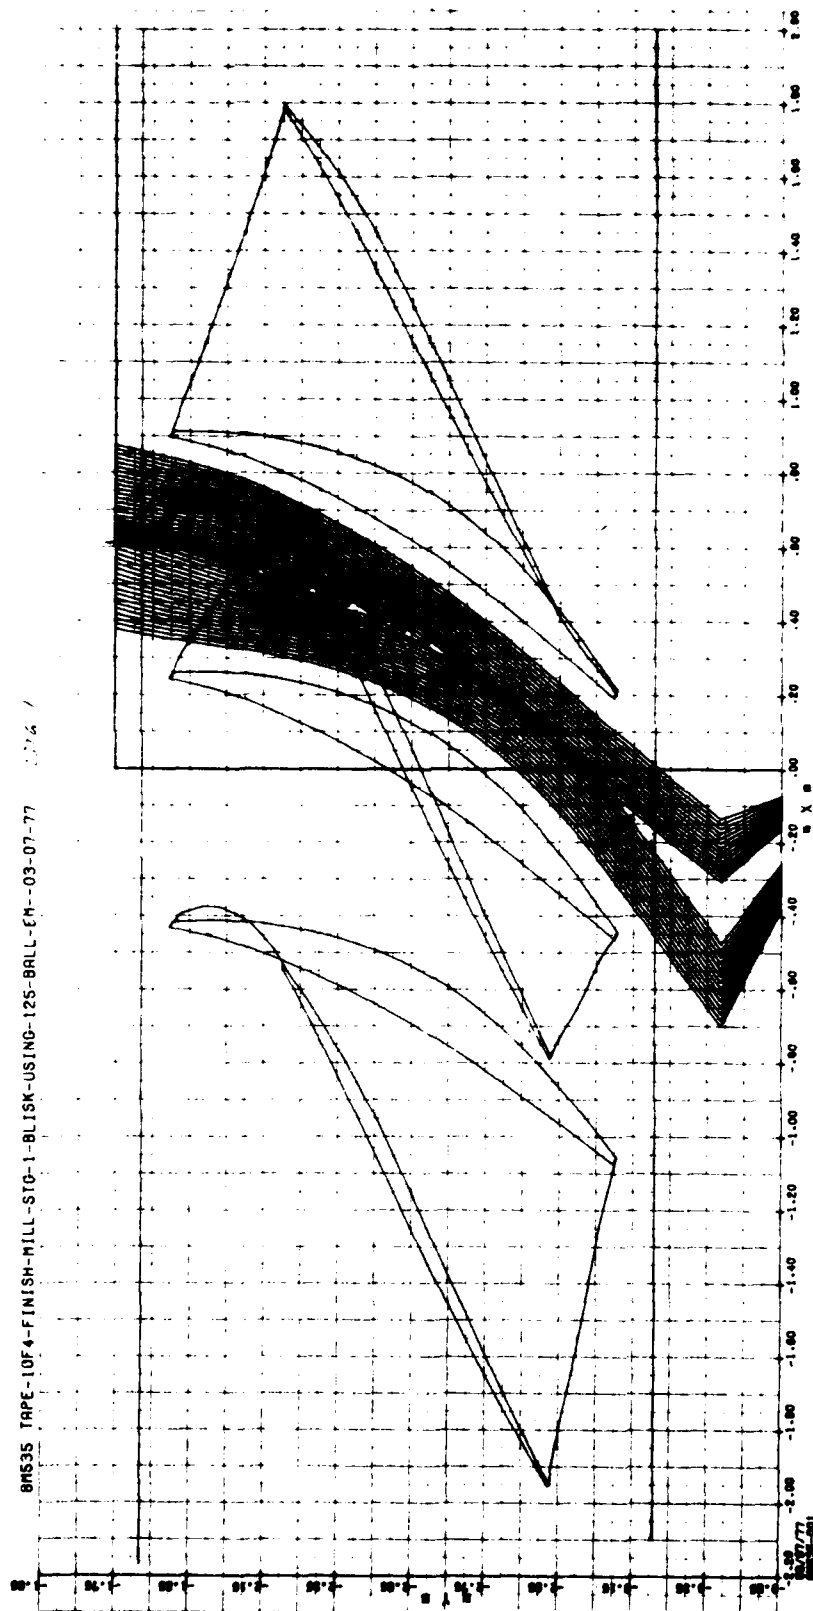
Computer Plot of Tool Paths to Finish Machine Platform.
